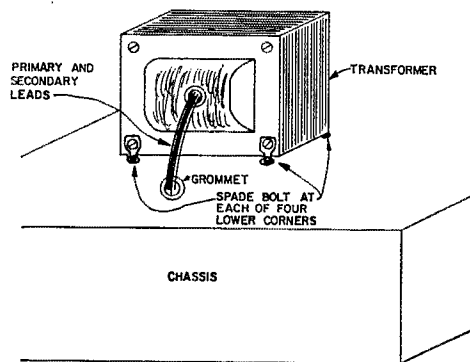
By mounting a transformer as shown, much chassis work is eliminated.
